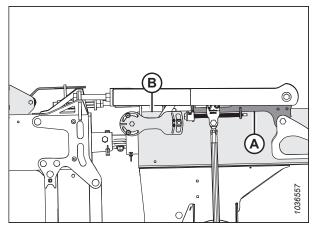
Bottom Edge of Bell Crank Parallel with Backtube
